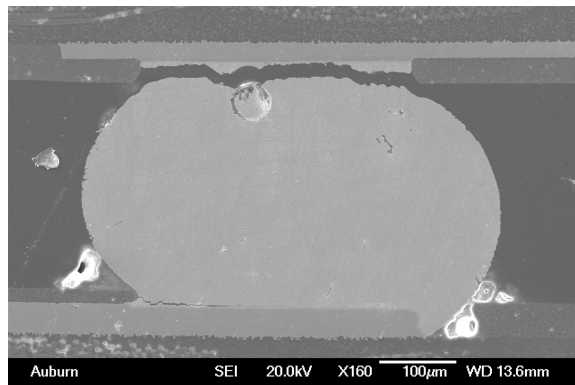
Solder joint crack on package-side and PCB-side
